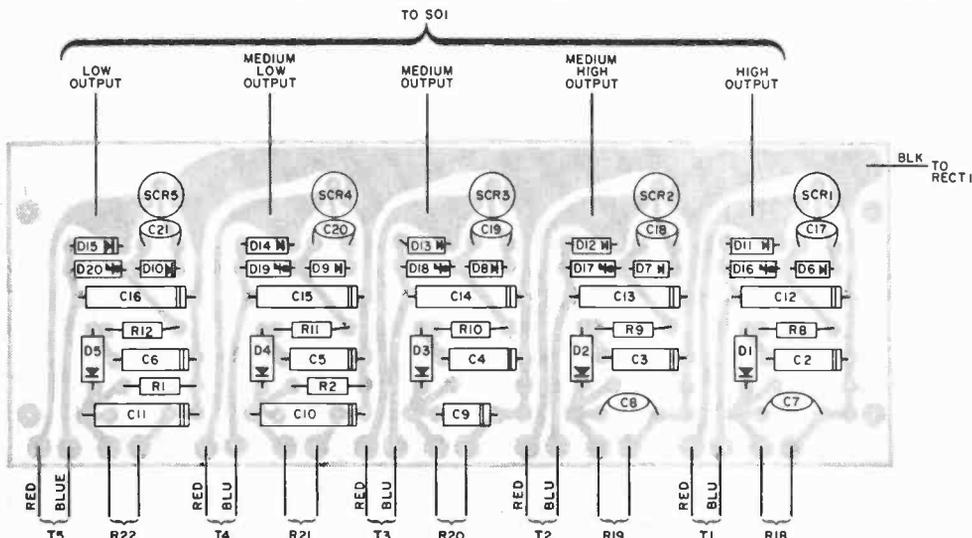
When mounting parts on the printed circuit board, be sure to position the diodes with the polarity markings as shown. Also, make all input and output connections from terminal pins on the circuit board.
